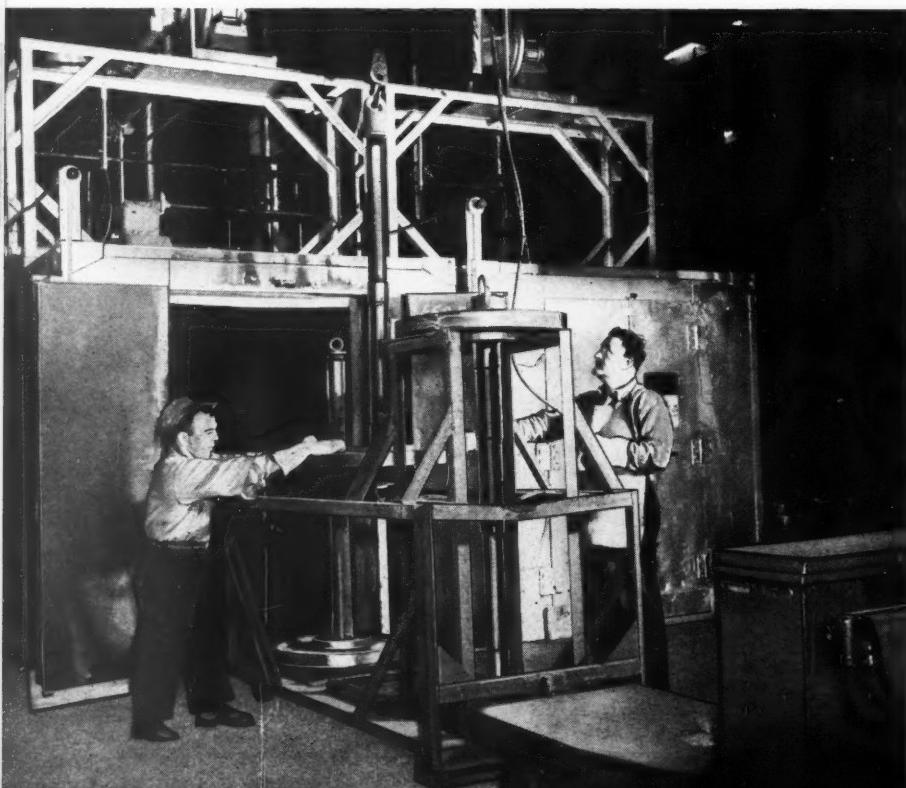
Turbine wheels and shafts are loaded into gas-fired furnaces for preheating. To obtain a shrink fit in assembly before welding, the wheels are heated to 1000 degrees F. and the shafts to 450 degrees F., after which their temperatures are equalized at 600 degrees F.
